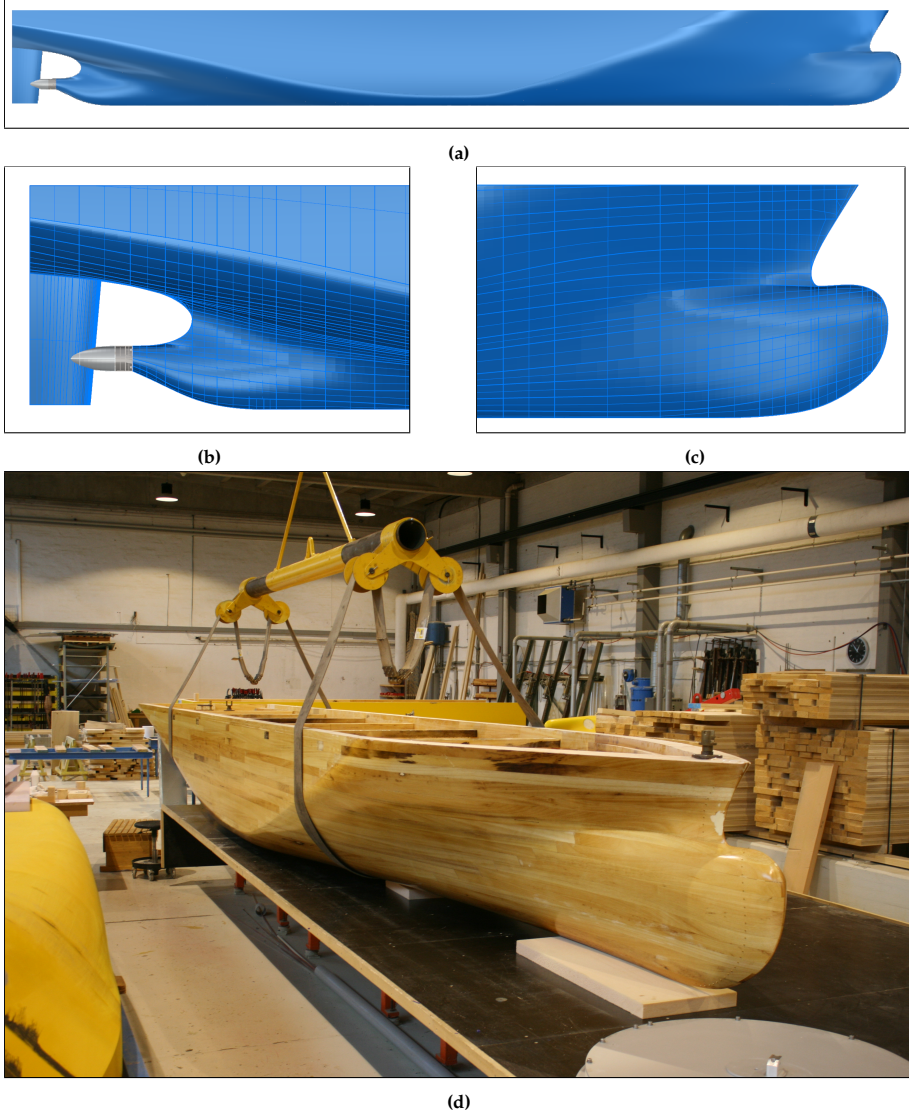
(a) Side view of the ship hull as a CAD drawing. (b) Side view of the stern as a CAD drawing. (c) Side view of the bow as a CAD drawing. (d) The build ship hull model.
